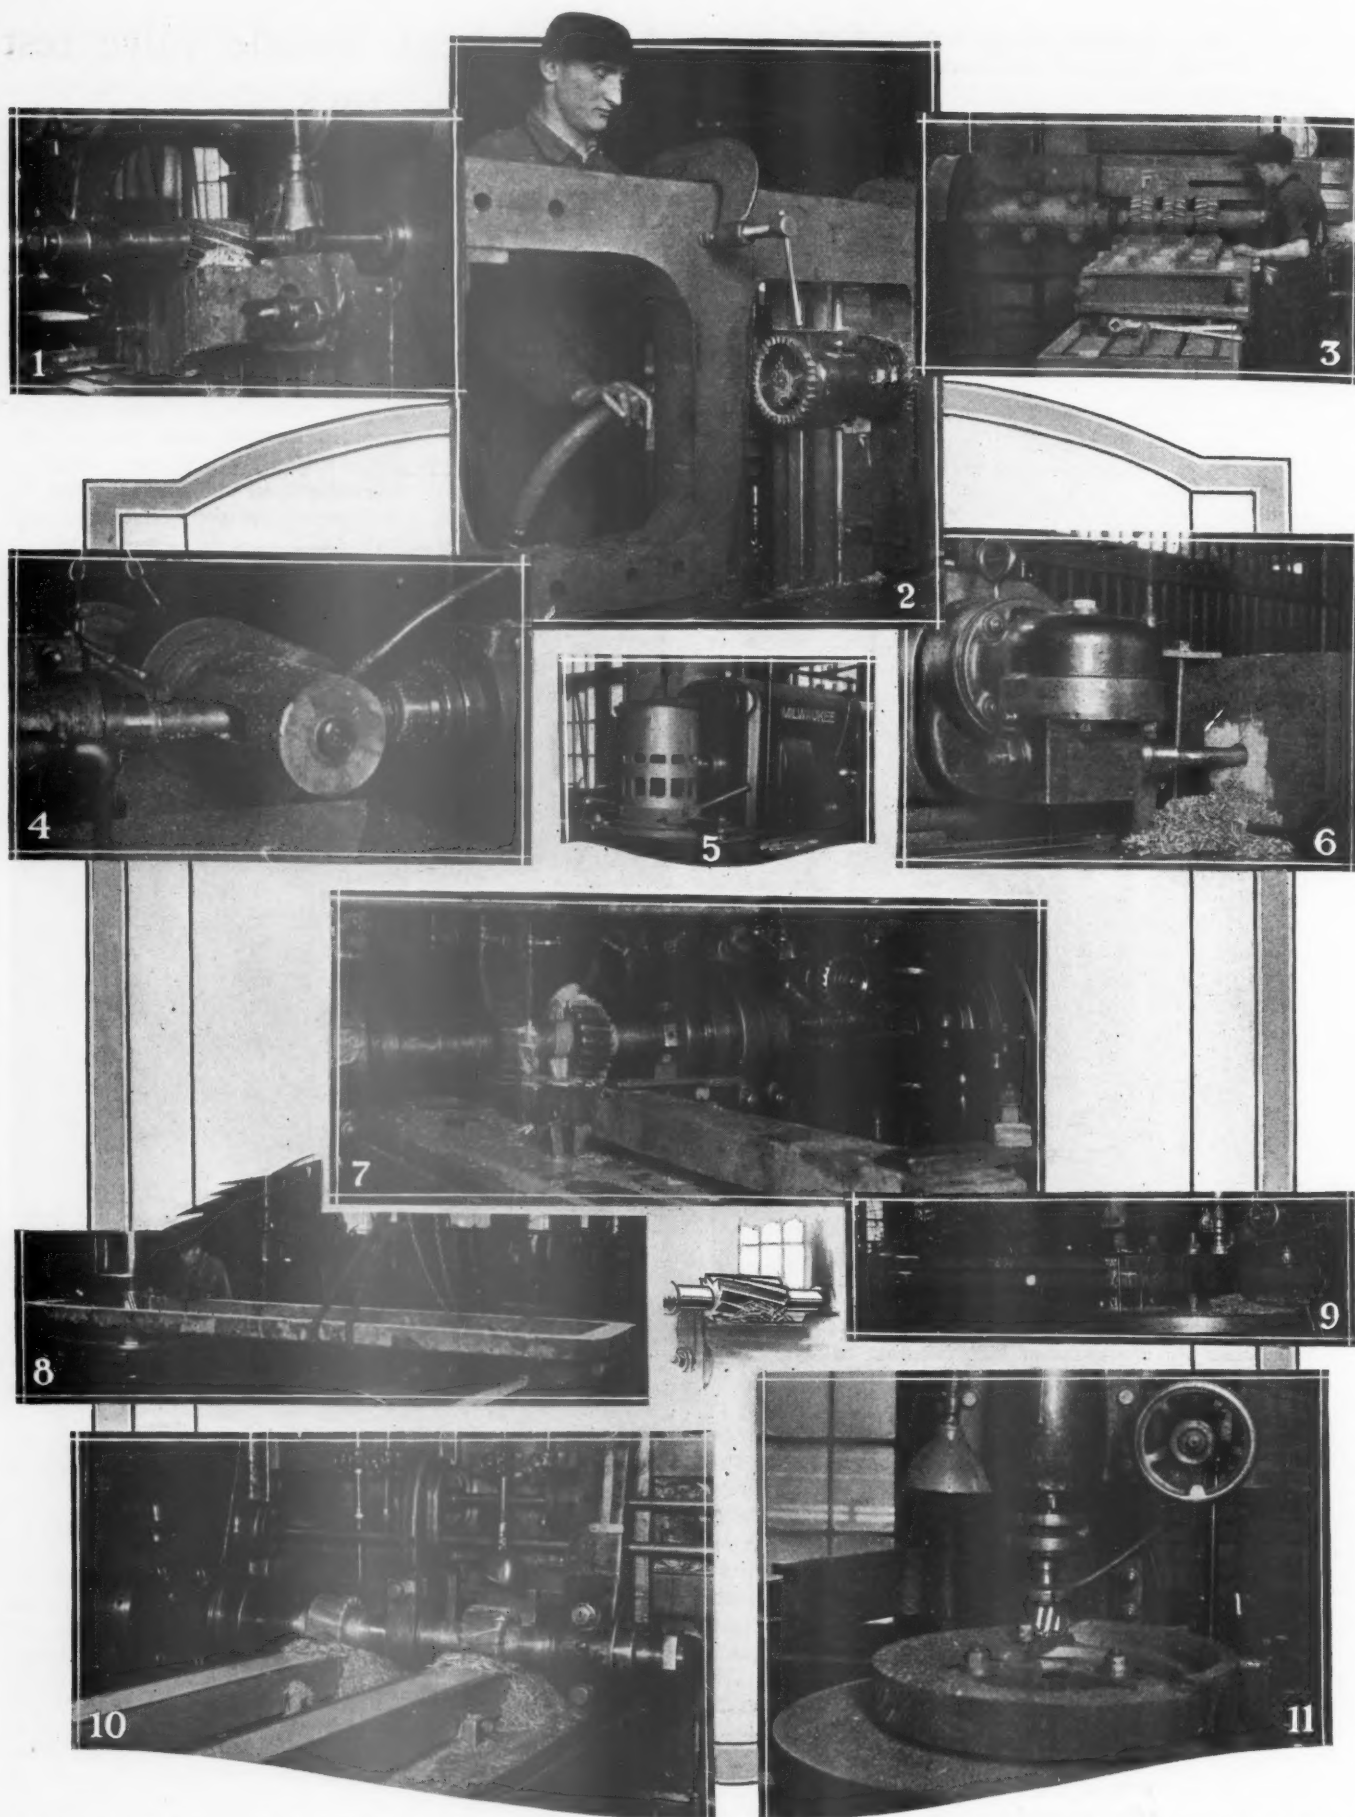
Milling contour of eccentric crank arm; Fig. 2—Facing driving box pedestal jaws; Fig. 3—Milling crosshead shoes; Fig. 4—Milling keyway in piston rod, using a helical cutter; Fig. 5—Middling ports in valve chamber bushing, using an end mill; Fig. 6—Cutting a die on a milling machine, using a special attachment; Fig. 7—Milling sides of crosshead guide, using a straddle cutter; Fig. 8—Milling the corners of a mud ring on a vertical miller; Fig. 9—Profiling the ends of two main rods at one set up; Fig. 10—Cutting channels in two main rods on a horizontal miller; Fig. 11—Milling the fit in a piston head rim.
